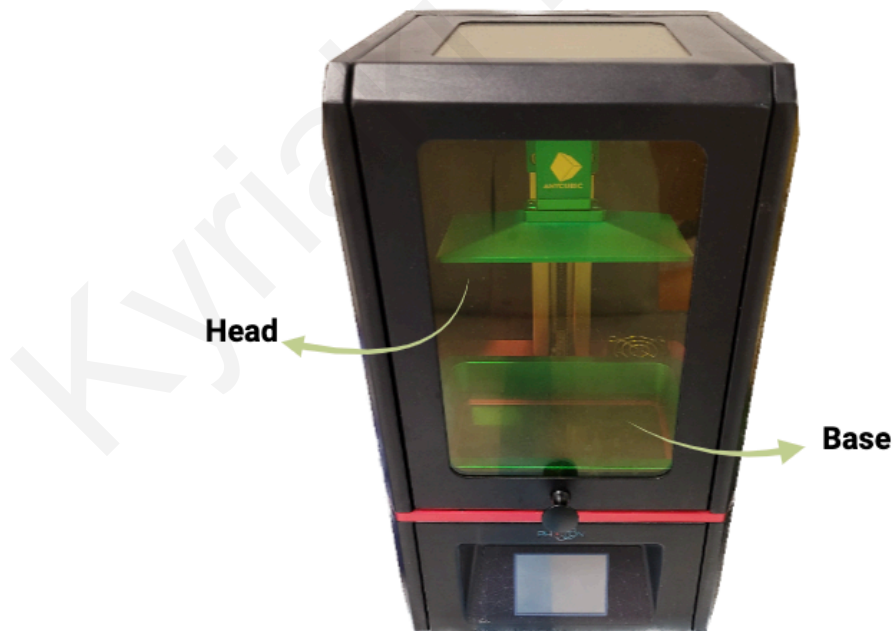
The ANYCUBIC 3D printer that we used for printing the mold.
